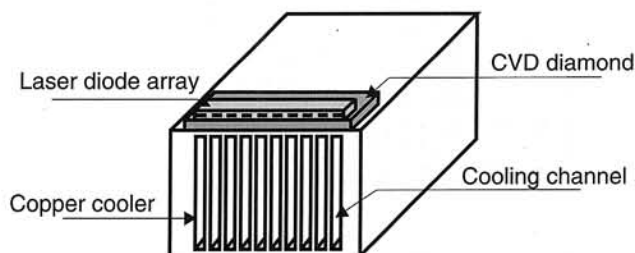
Cooling system consisting of a diamond spreader soldered to a copper heat sink with channels provided for cooling water.
